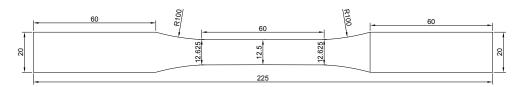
Details of tension test specimen (All dimensions are in mm)
